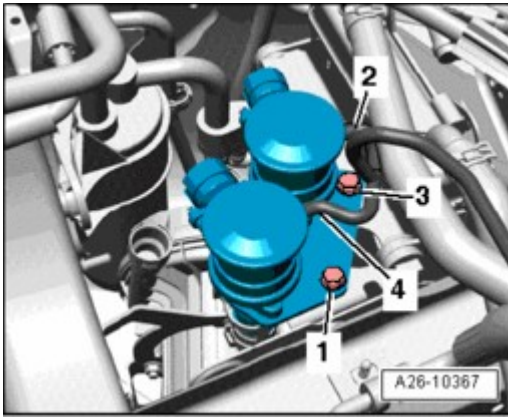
Identifying Vacuum Hoses, Bolts, Secondary Air Injection Combi-Valves
